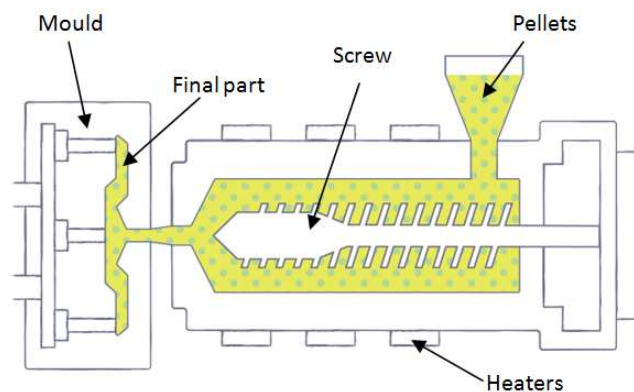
Sketch of composite manufacturing process performed by injection moulding (adapted from [9])
